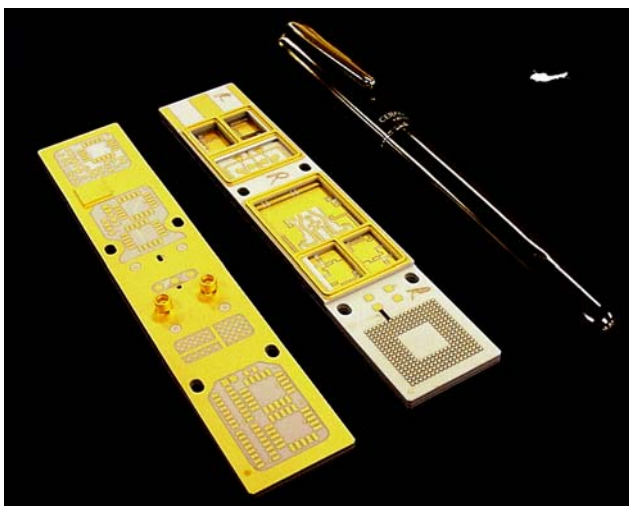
A typical integrated T/R module package with deep cavities, heat sink, seal rings, and RF connectors. Material is alumina. Courtesy of EADS Astrium, UK.
